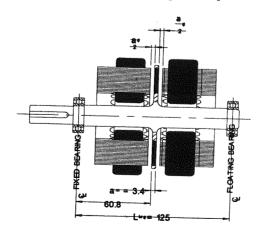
Relationship between Motor Bearings, Stators and Rotor.
